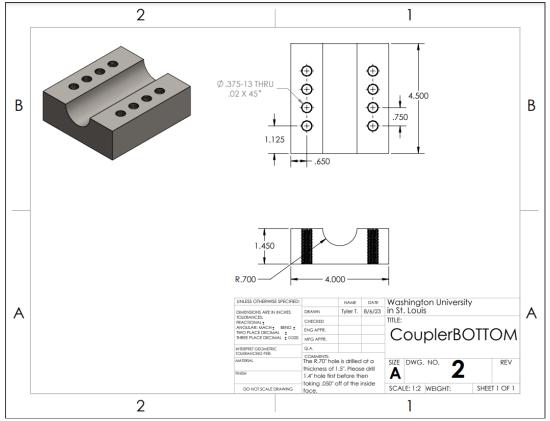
DRAWING OF THE BOTTOM SEGMENT OF THE SWITCH ROD COUPLER.
